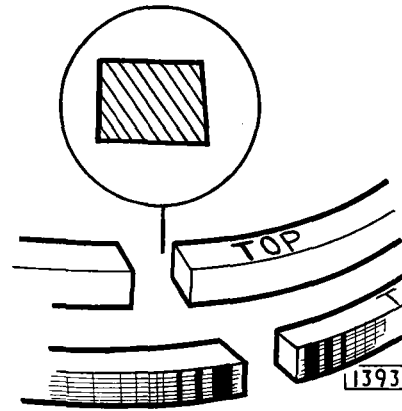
Showing the identification marks on tapered periphery compression rings.
